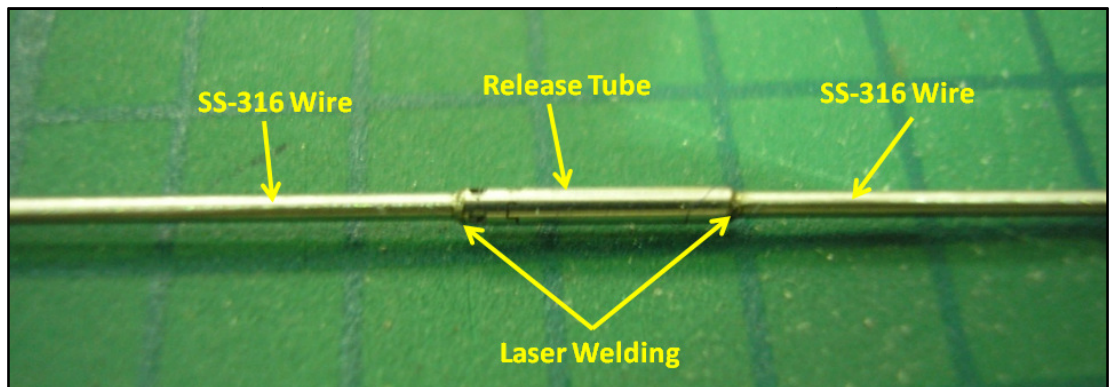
SS-316 WIRES LASER WELDED AT BOTH ENDS OF RELEASE TUBE
